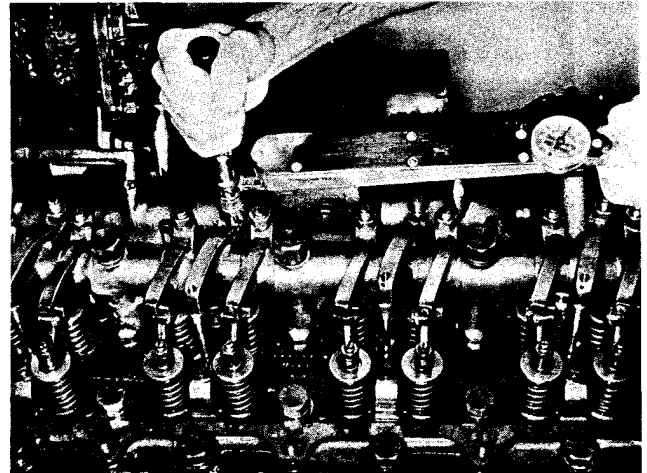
, (V51489). Torquing injector adjusting screw locknut
